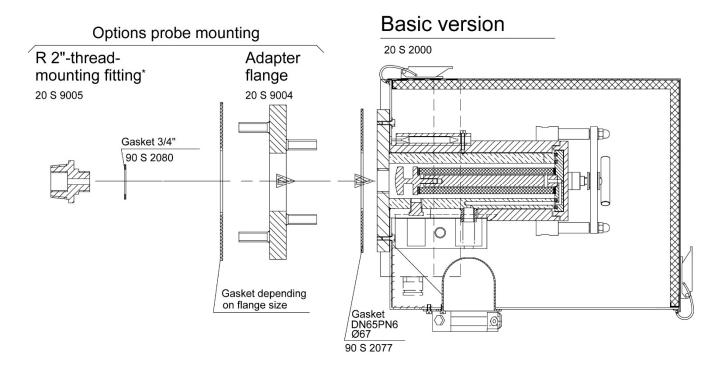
Mounting possibilities SP2000..., SP2300-H, SP2400-H
